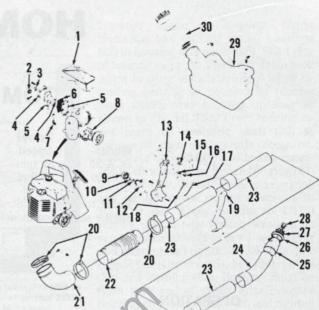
Exploded view of sprayer components on Model HB-680.
